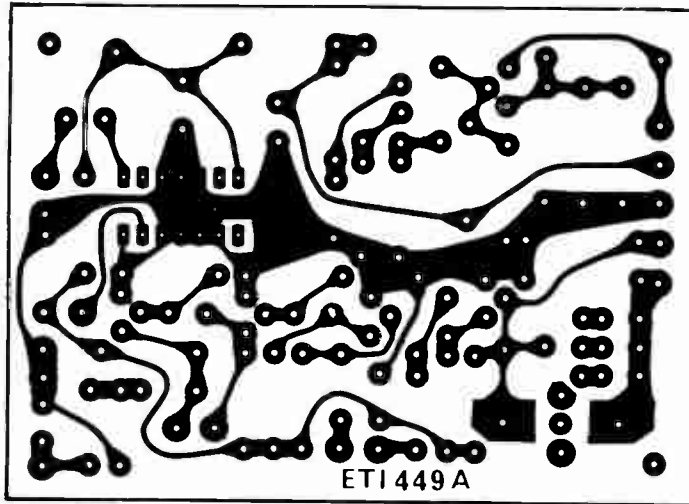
Printed circuit layout. Full size 90 x 65 mm.
